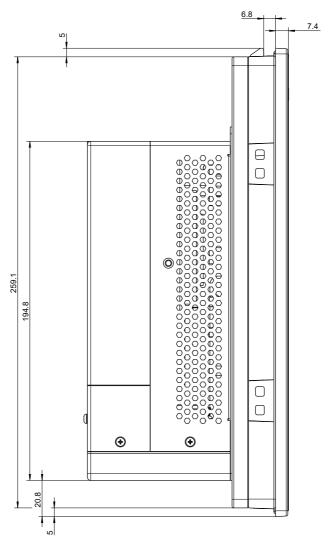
Housing dimensions of the device VR4x15, left side view
